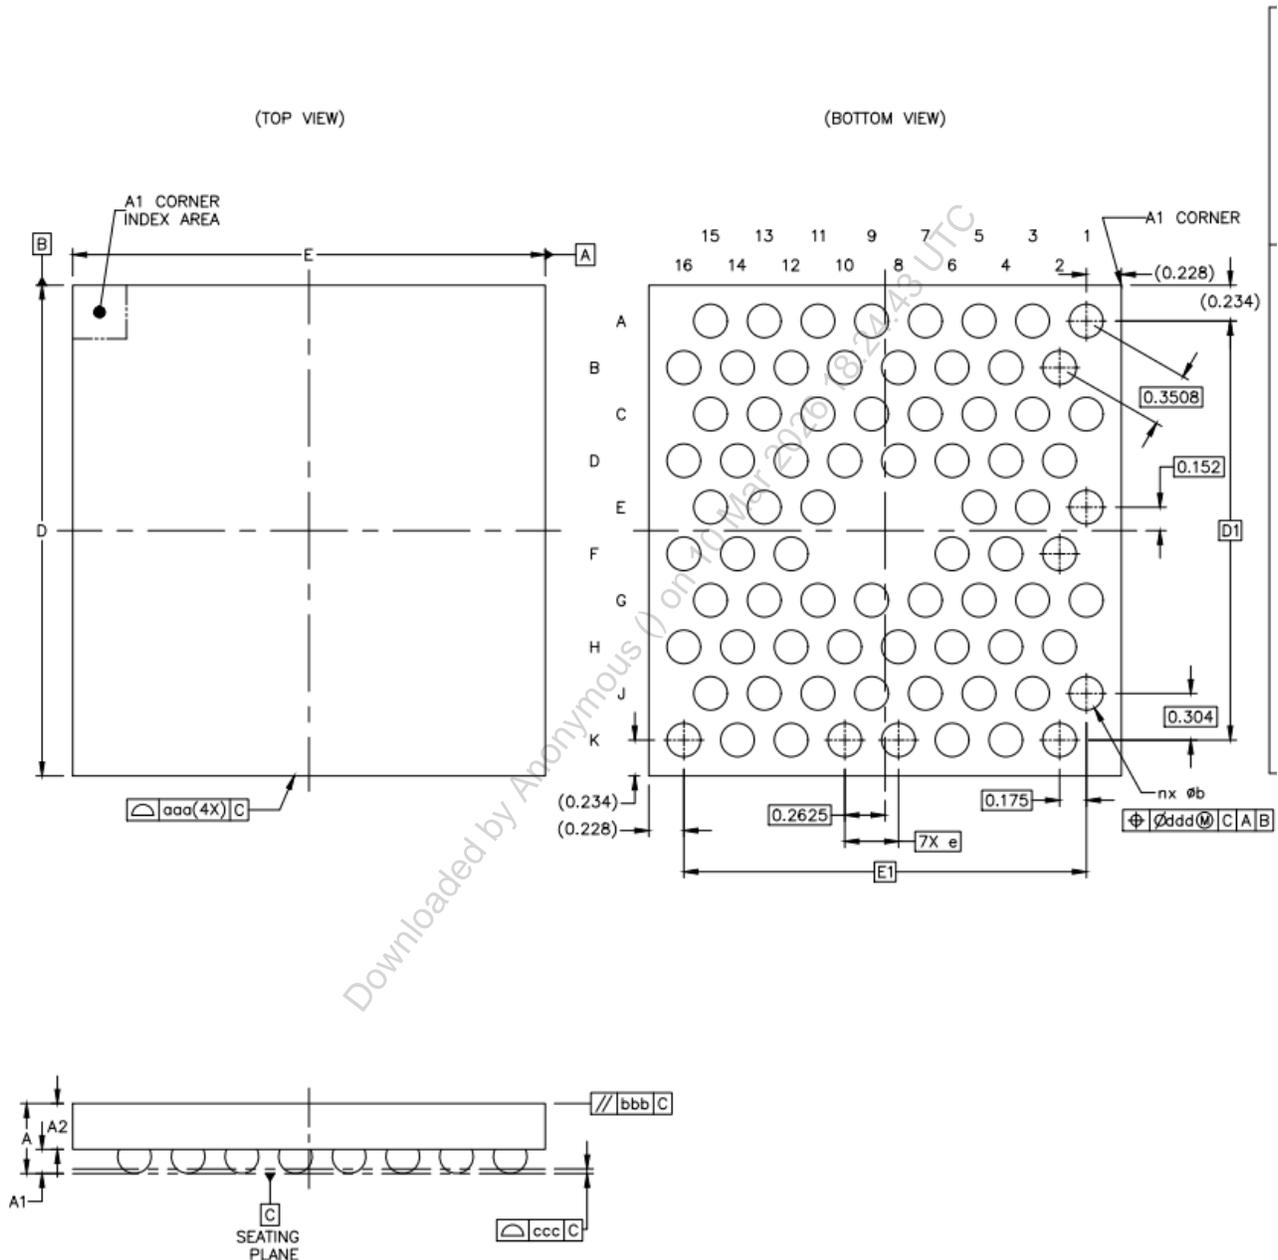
WLCSP package drawing for SR80 Series (units in mm)
